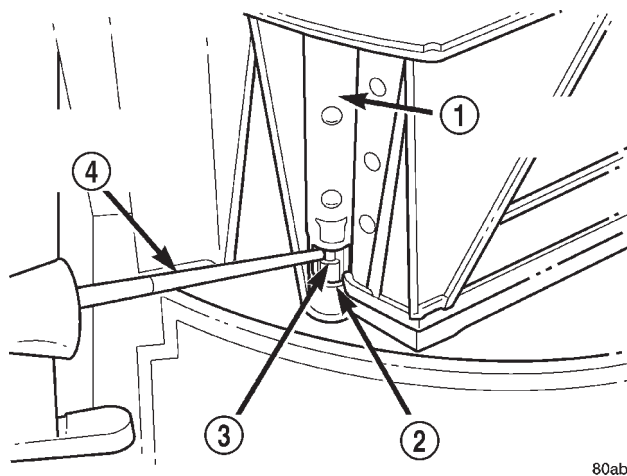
FLOOR DOOR REMOVE/INSTALL (typical)
